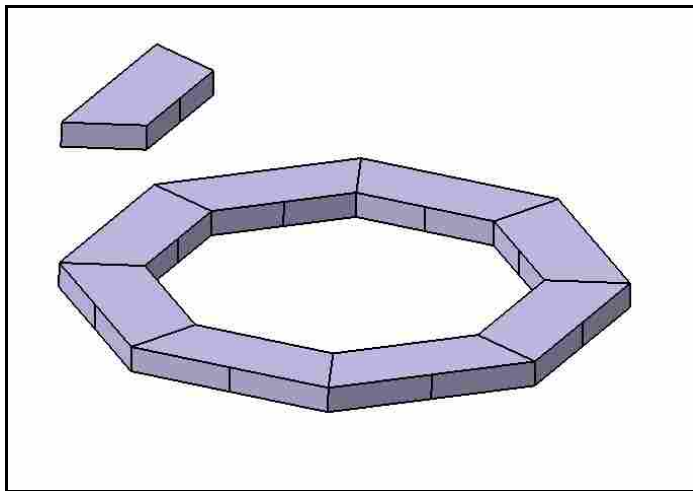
Single insulation block and assembly of blocks upon which the support plates rest.
